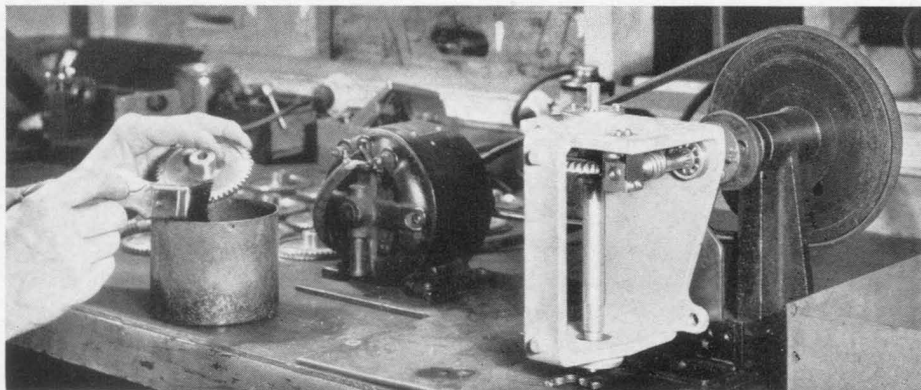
At the right is shown the motor-driven assembly for "wearing-in" the worm and gear. After this is finished, the gears must be washed in gasoline, as shown at the left, to remove the fine particles of grinding compound
